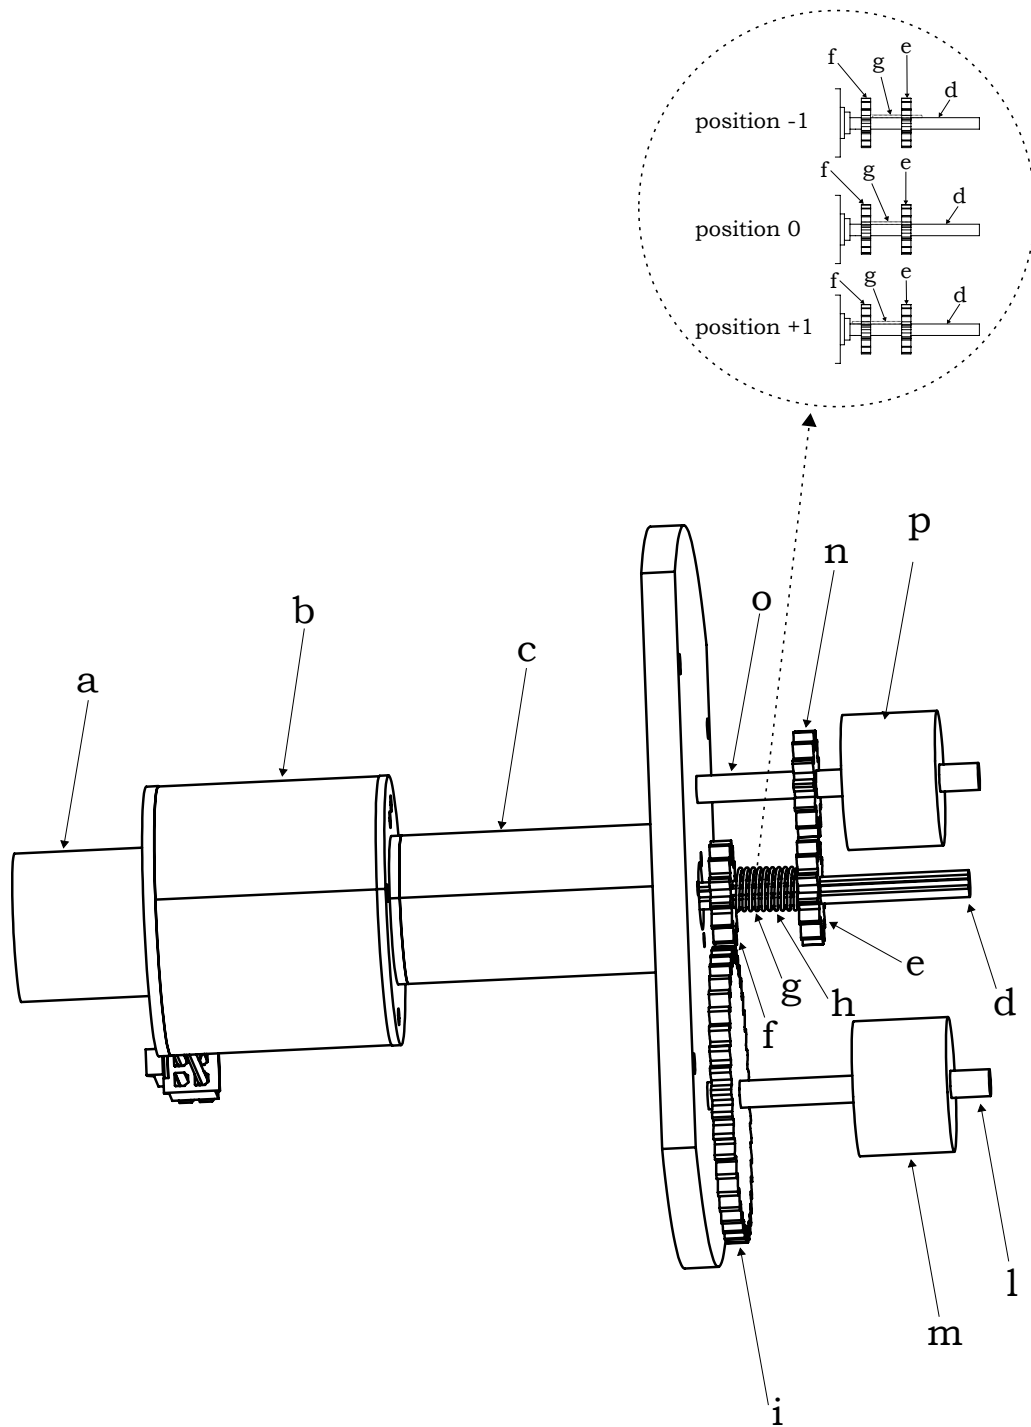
Actuation system of the tendon-driven exoskeleton. The main components of the wearable robot are: absolute encoder (a); electric motor (b); planetary reducer (c); principal transmission shaft (d); two principal gear wheels (f) and (e), solenoid (h); mechanical pin (g); two secondary transmission shafts (o) and (l), two secondary gear wheels (i) and (n); two coils (m) and (p).
